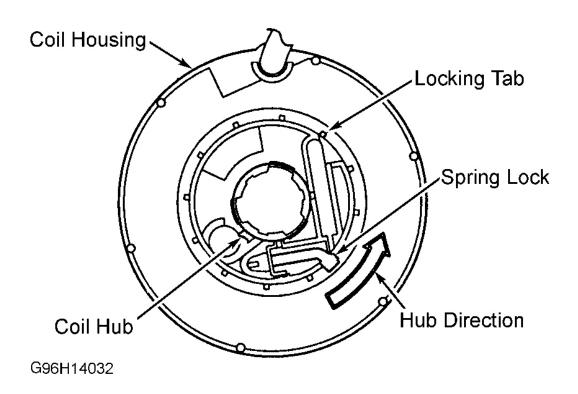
Centering SIR Coil Assembly Courtesy of GENERAL MOTORS CORP.
